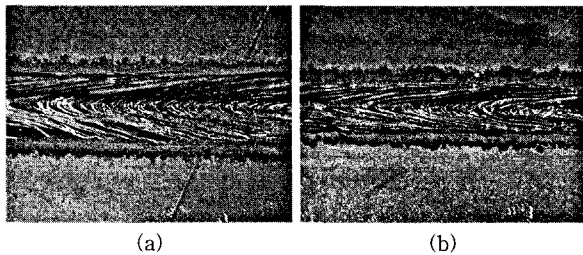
Weld bead surfaces for CO<sub>2</sub> Laser-micro plasma hybrid welding: (a) with laser preceding, (b) with arc preceding
